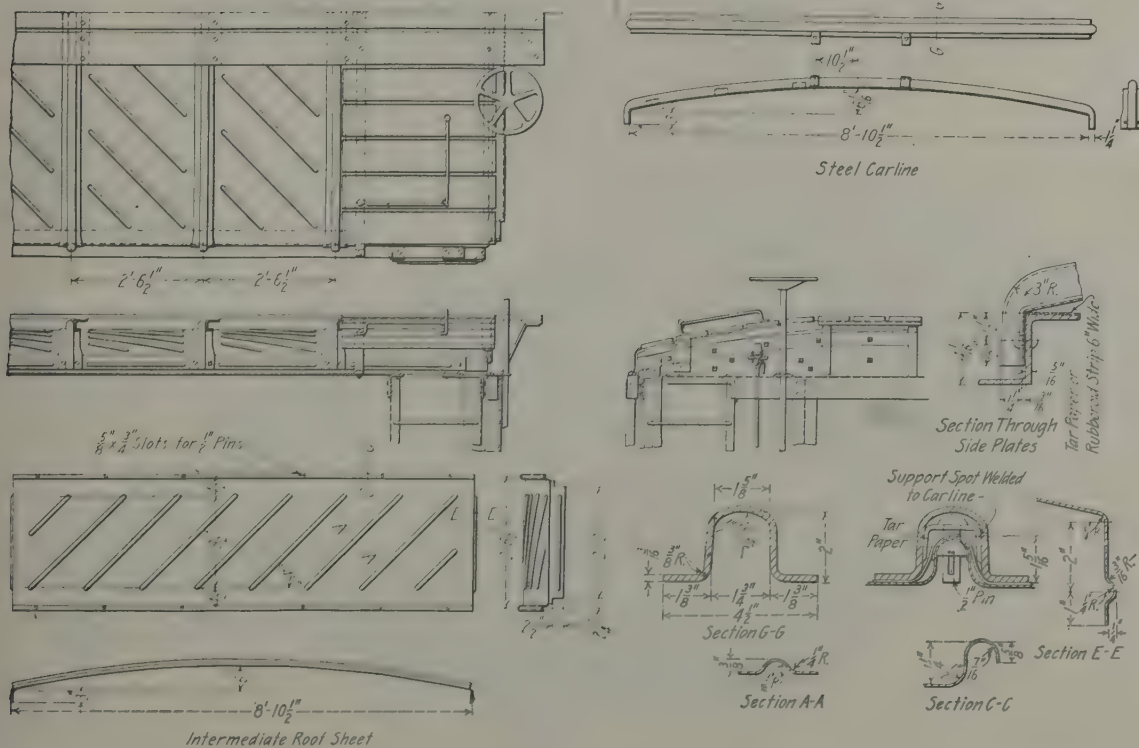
Hutchins Camber All-Steel Roof. Hutchins Car Roofing Company.
